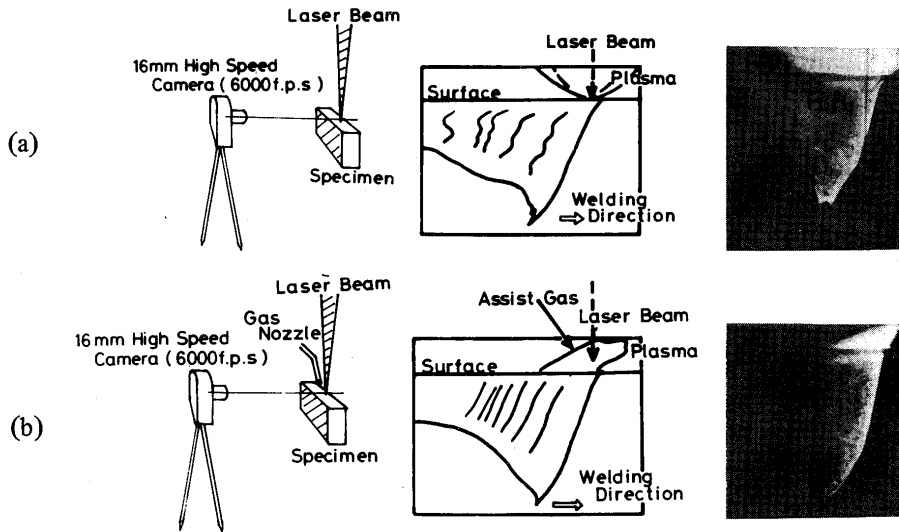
Side views of glass during laser welding. (a) 0 l/min, (b) 7.5 l/min
